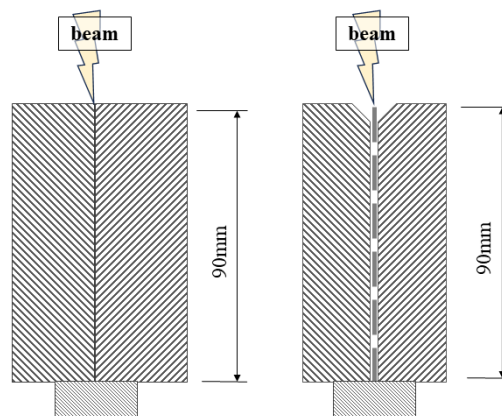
Joint Setup. Left, butt welding, without filler. Right, butt welding with Ni foil.
